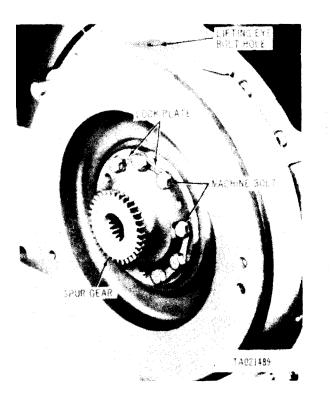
Removing transmission drive spur gear, model AVDS-1790-2C and AVDS-1790-2D engines.
